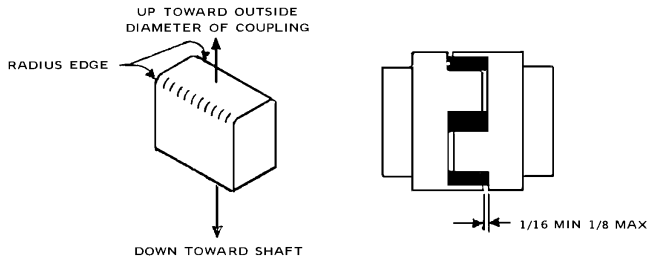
INSTALLATION OF COUPLING – STYLE “A”
